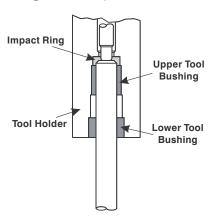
Checking Wear Of Tool Bushings and Impact Ring
